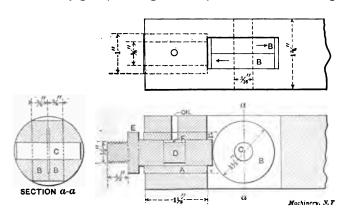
Sectional View showing the Back-center and its Double Roller Bearing
